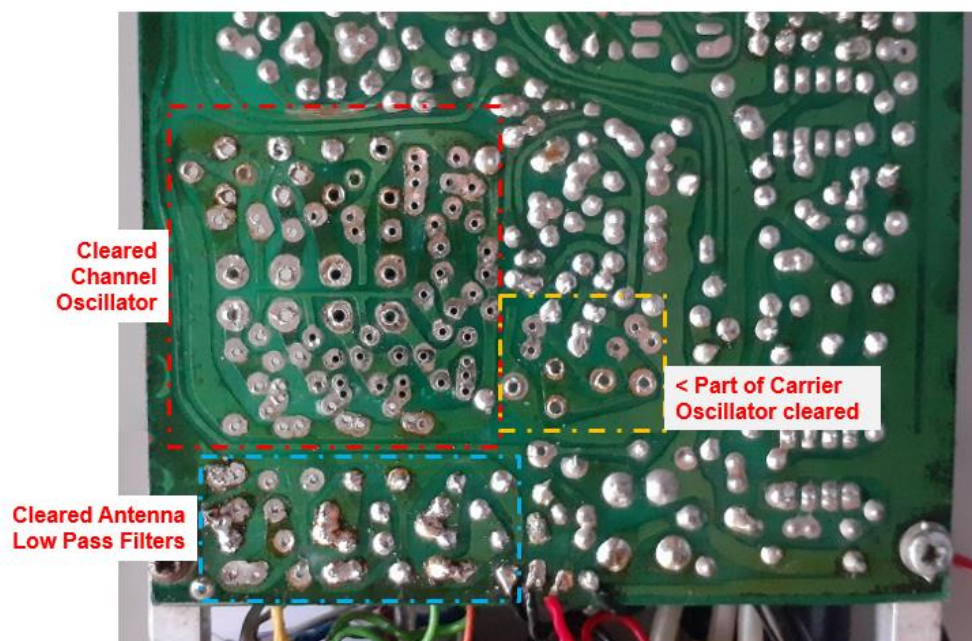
View of the underside of the MRS-1 PCB showing areas to be cleared of components
